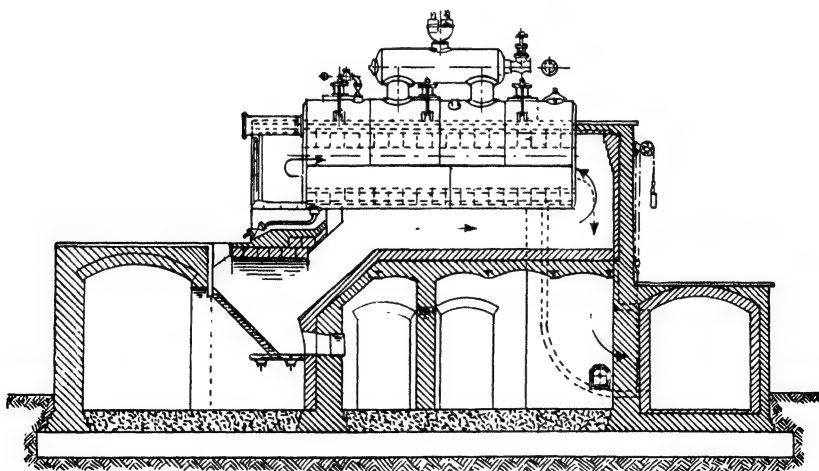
Special Multi-tubular Boiler with Frontal Furnace for burning Bagasse or Refuse Fuel
